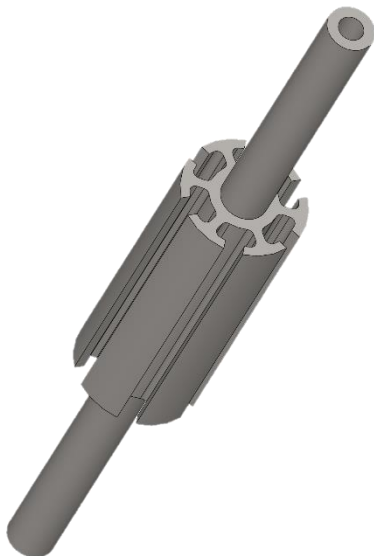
The shaft inside the center of the stator with a hole through the middle.
